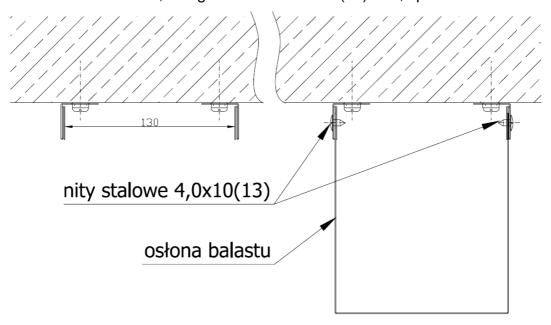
Installing the ballast cover (ballast at the gate stopper side)
